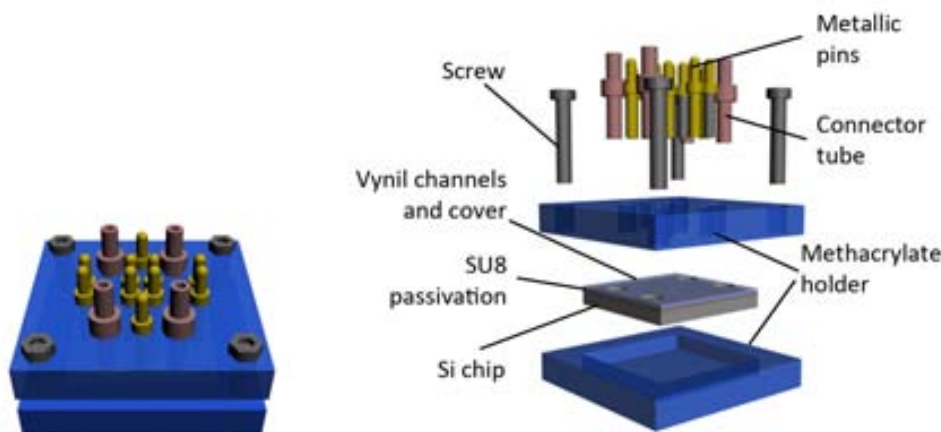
Holder type packaging. In the right different parts of the holder are depicted.
